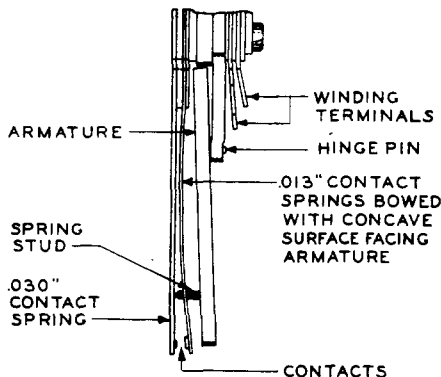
Fig. T - Position of Bowed Spring Before Final Tension Adjustment
